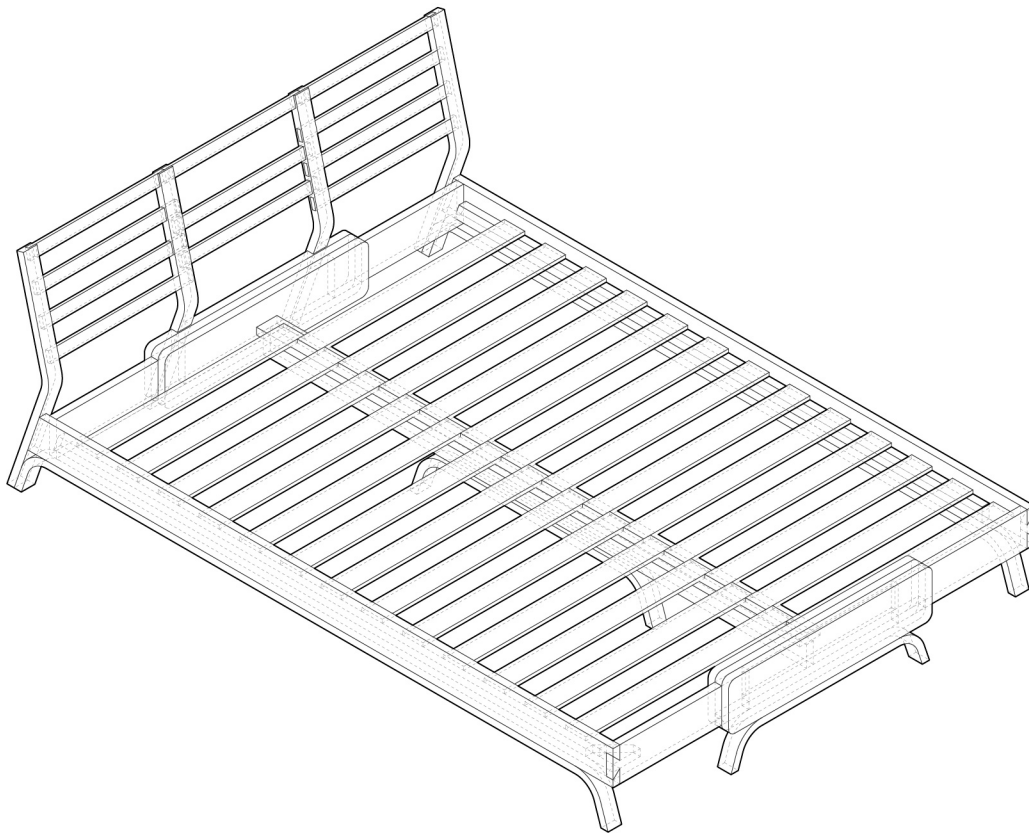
Bed Axonometric - Queen Size, Drawing by Author
